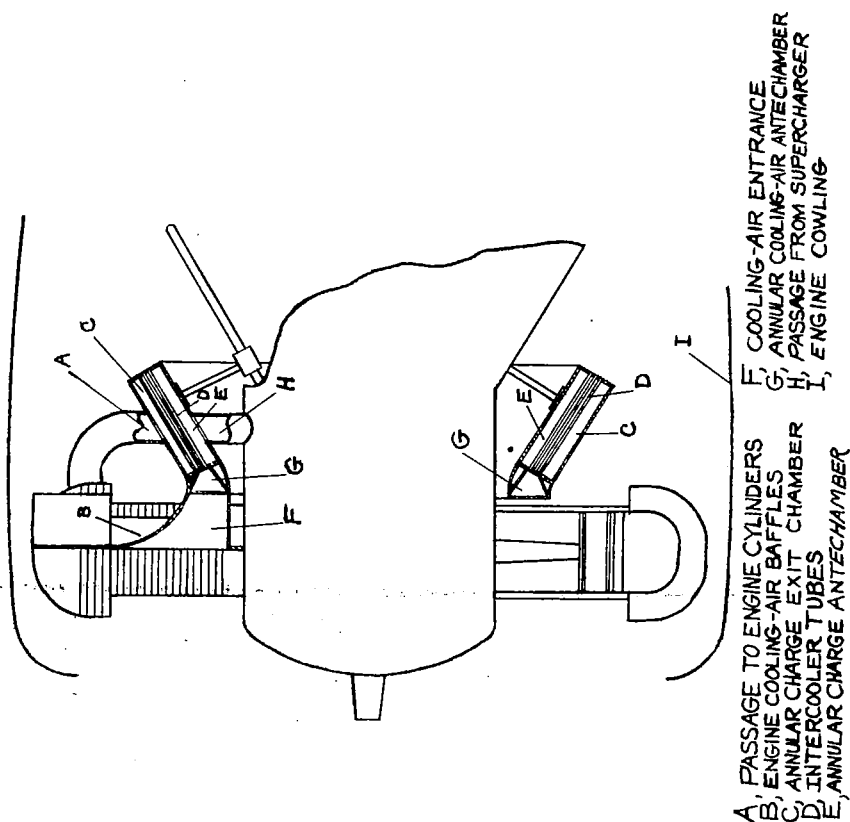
TYPICAL ANNUAL INTERCOOLER ASSEMBLY.
